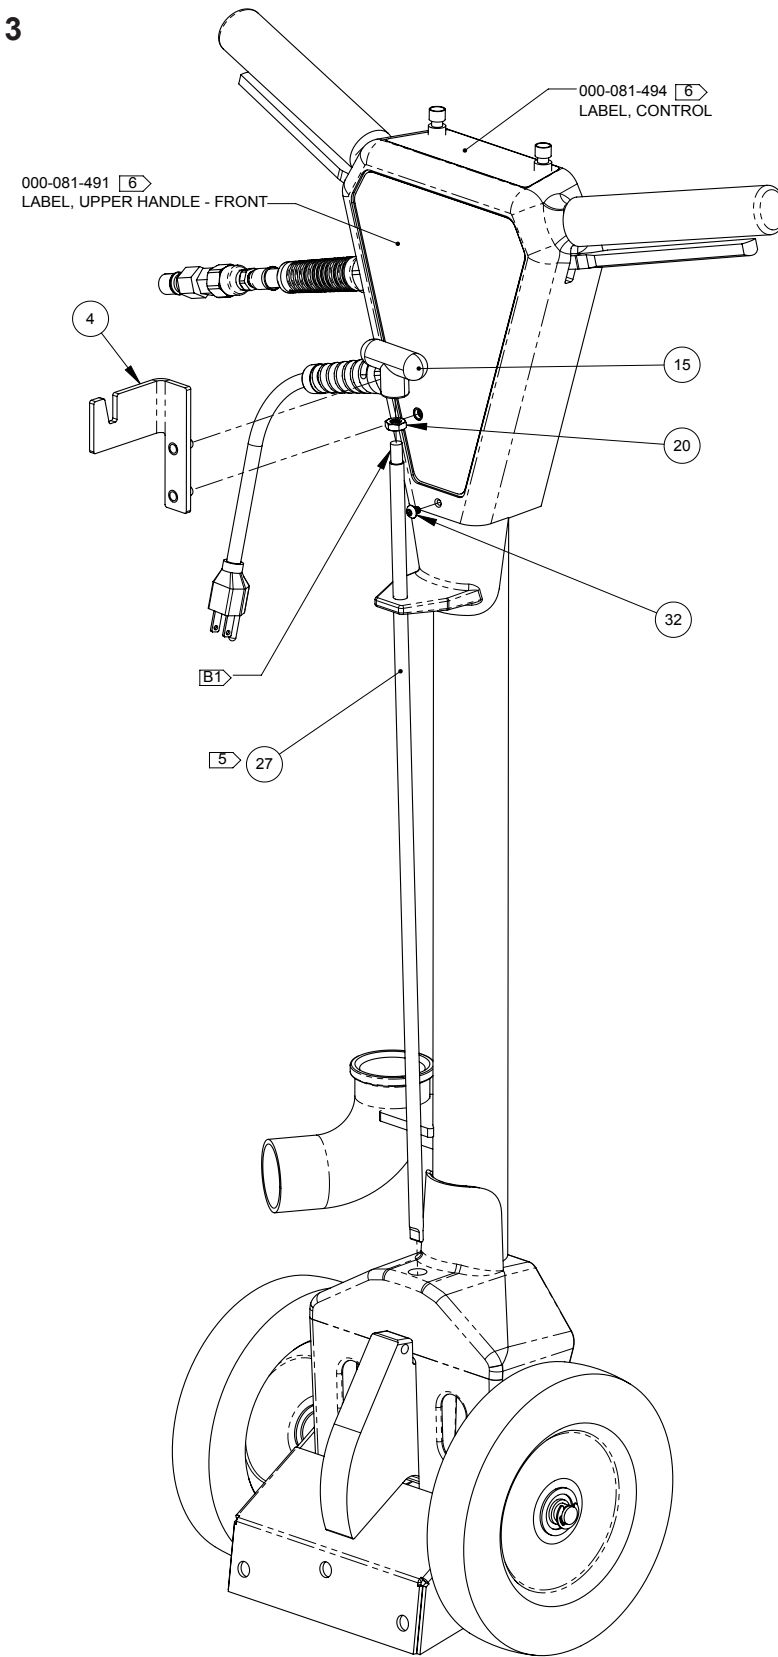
Upper and Lower Handle Assembly - View 2 of 3
